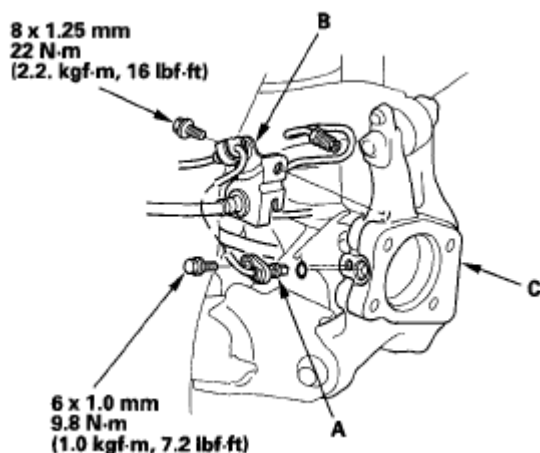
Identifying Wheel Sensor, Brake Hose Mounting Bracket From Knuckle (With Torque Specifications)
